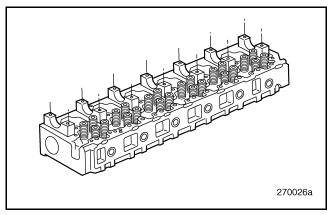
Cylinder Head with Valves and Camshaft Supports
